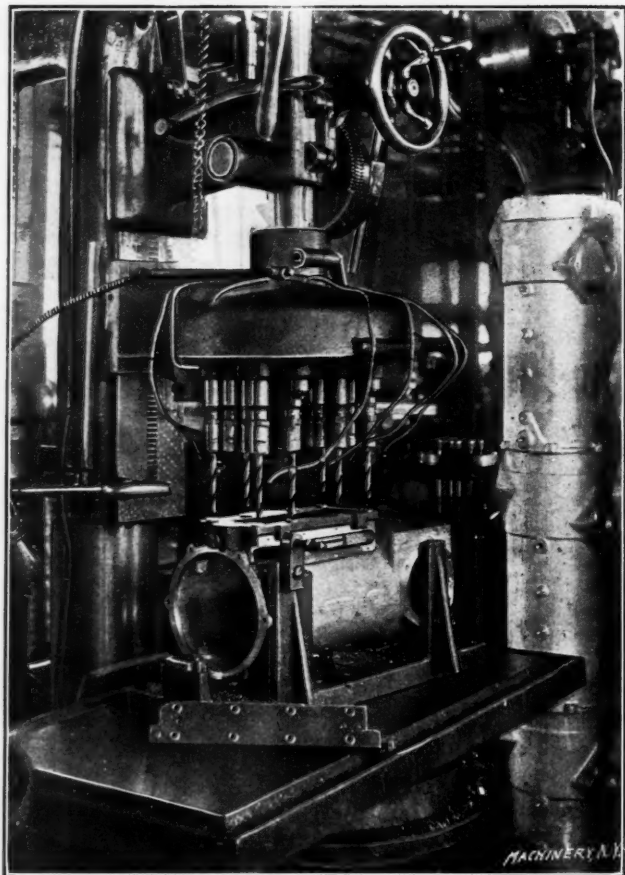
A Multiple Spindle Drilling Head arranged for Two Lay-outs.
